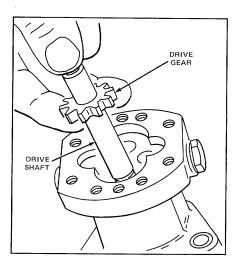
Installing Fuel Pump Drive Shaft and Gear Assembly
